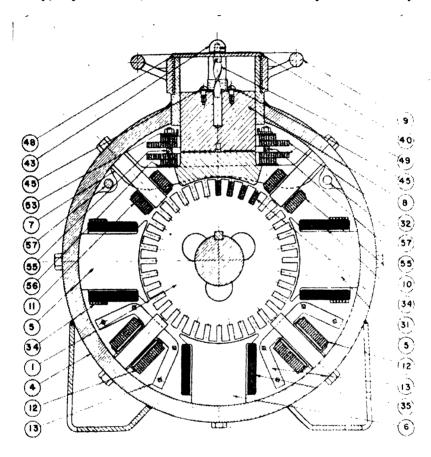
A variable magnetic gap D.C. arc welder: 1 Rotor; 2 Housing; 5 Field pole; 8 Movable field pole; 9 Hand wheel
